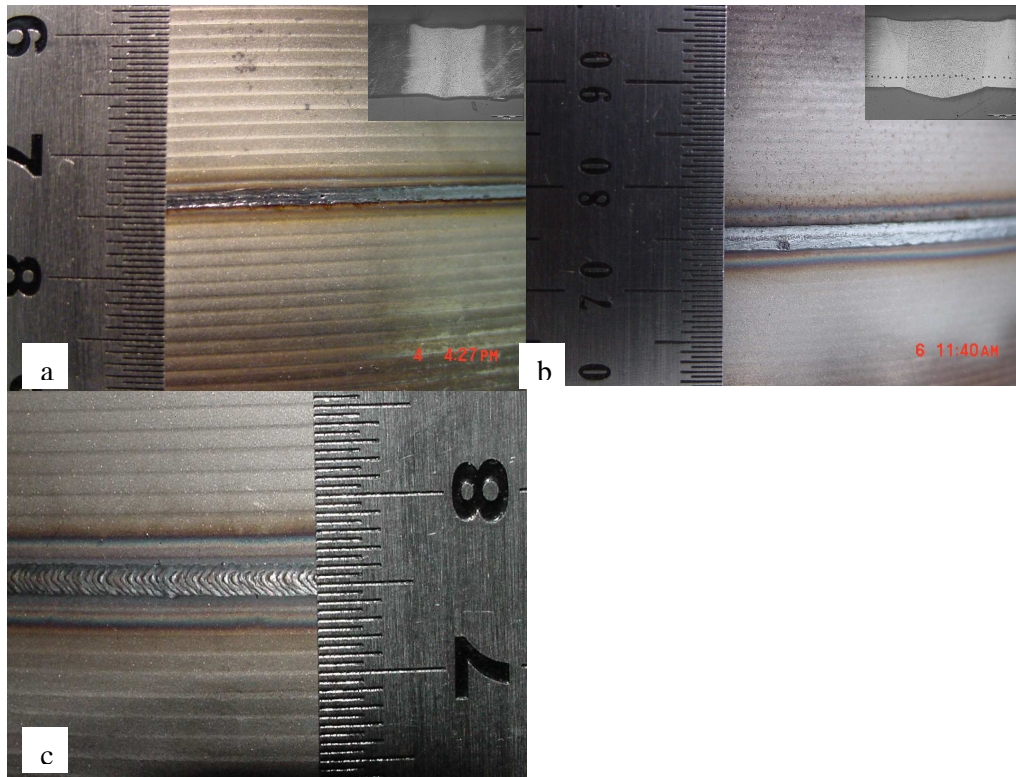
Laser welded butt joints. a) Single spot, b) twin spot, c) pulsed Nd:YAG weld
